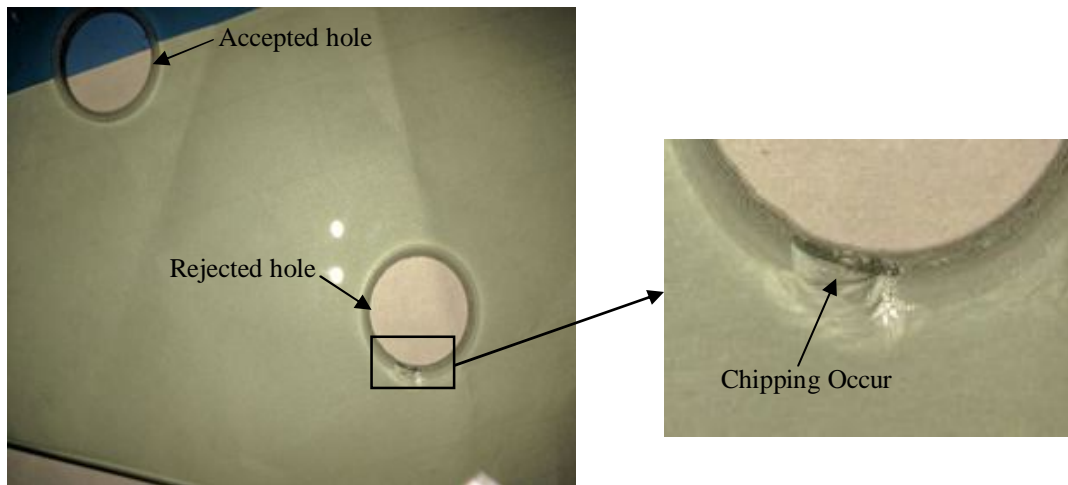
A float glass workpiece drilled by diamond drilling
